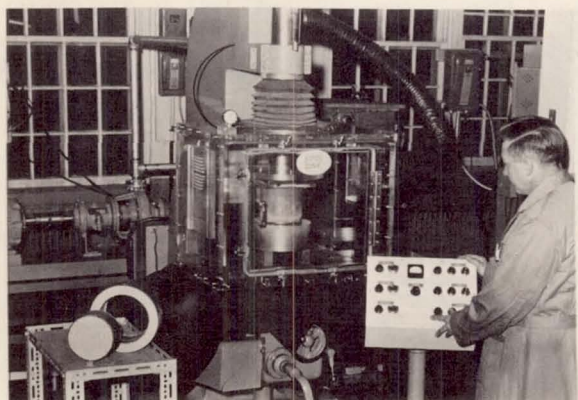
Sifko sink machine. Electrochemical machining. (Courtesy Steel Improvement & Forge Co.)
